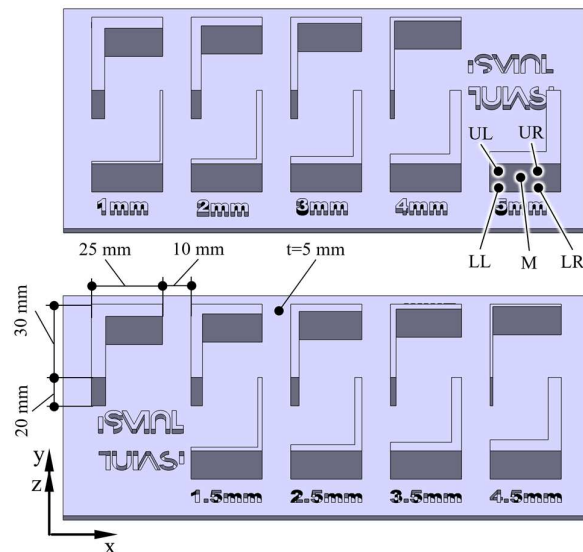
Wall-thickness benchmark, with nine L-shaped pockets ranging from 1 to 5 mm in 0.5 mm steps and embossed/debossed nominal-size labels of 3 mm height.
